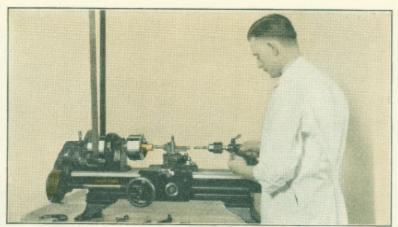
Making a Bushing in the 9-inch Junior Lathe
